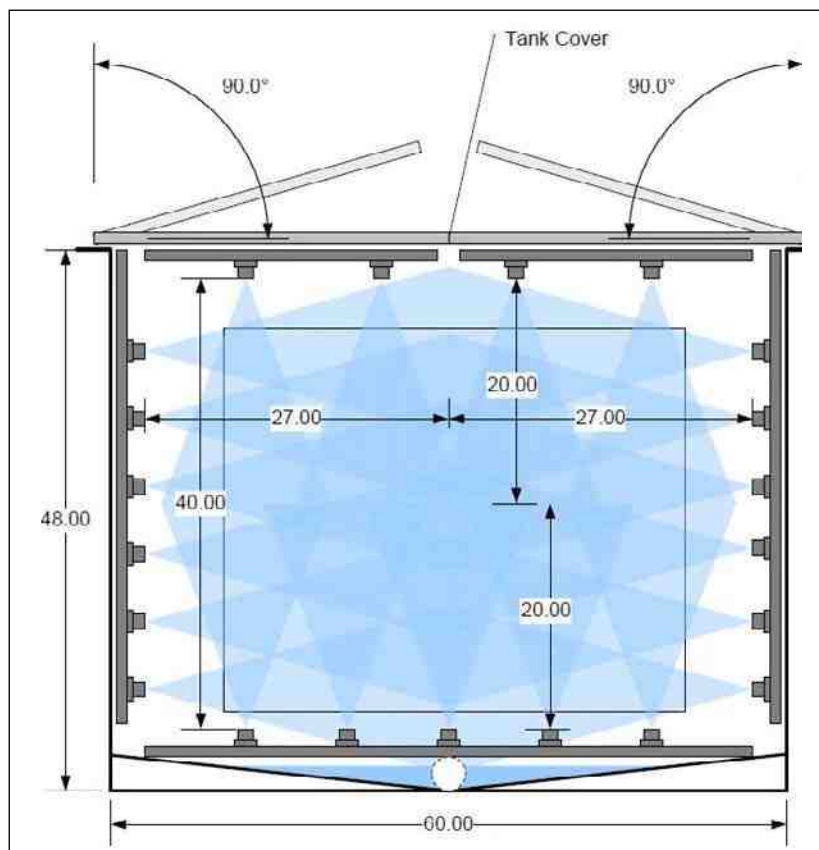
Spray cabinet with side-mounted, bottom-mounted and cover-mounted nozzles.
